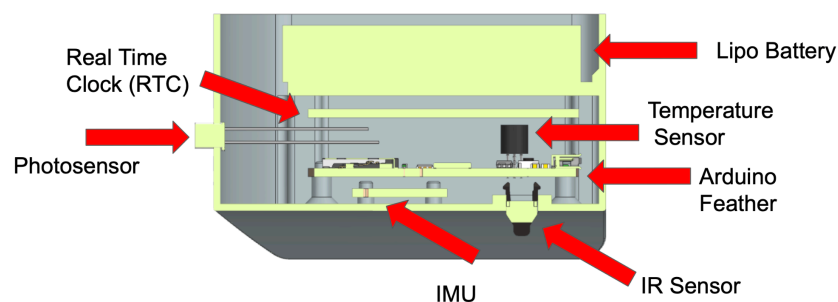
Cross section view of C-HAT electronics with callouts for components.
